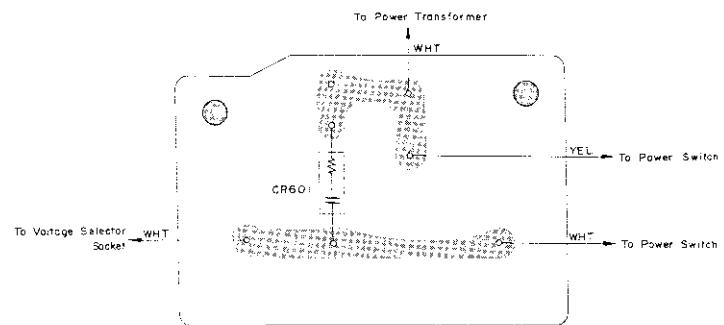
Bottom View of AC P.C. Board, PC-011 (Europe)
